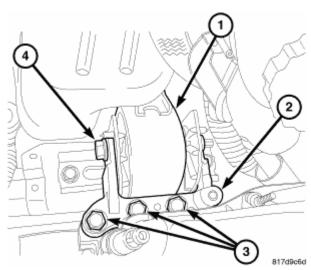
RIGHT ENGINE MOUNT Courtesy of CHRYSLER LLC
